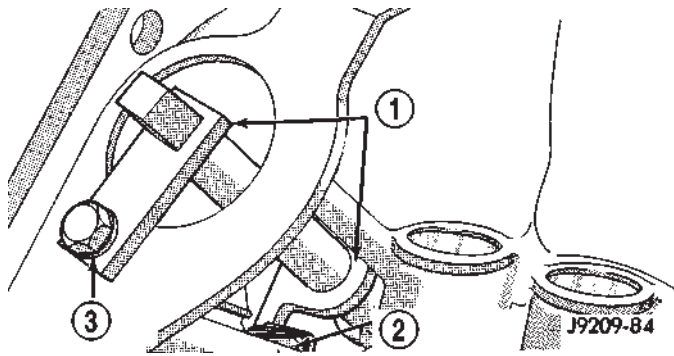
Camshaft Holding Tool C-3509 (Installed Position)
